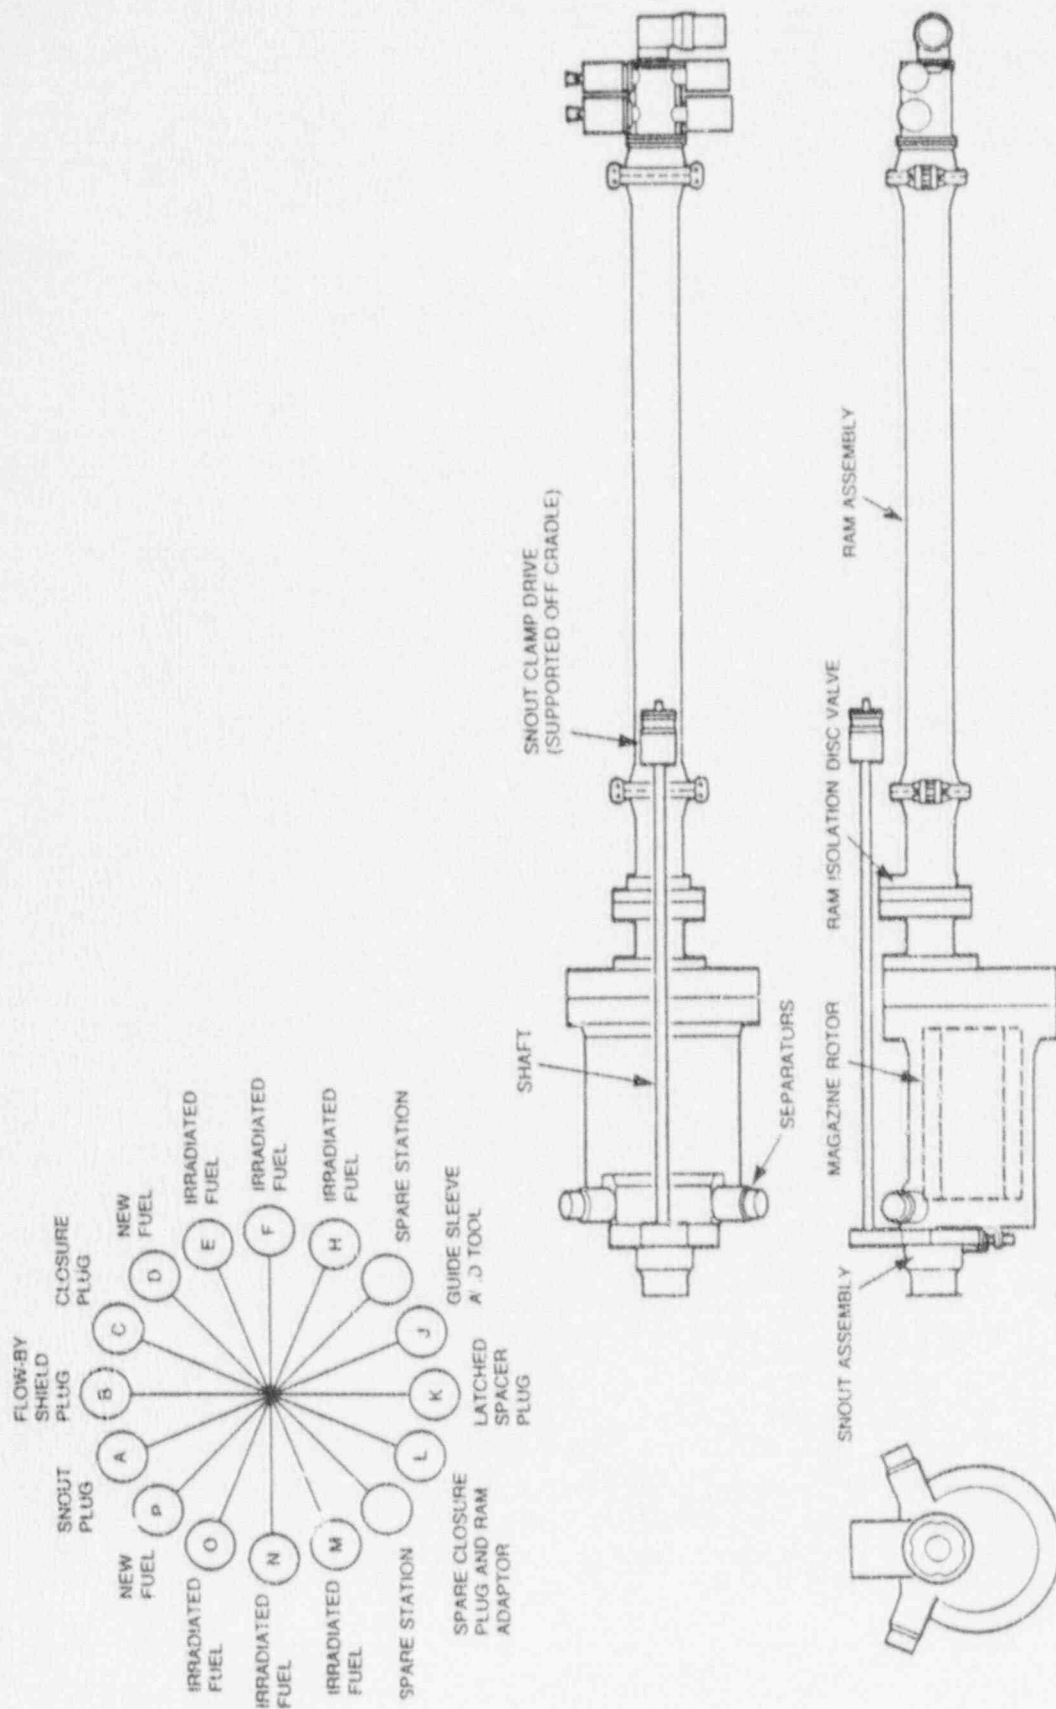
FUELING MACHINE HEAD - MAJOR GEOMETRY
